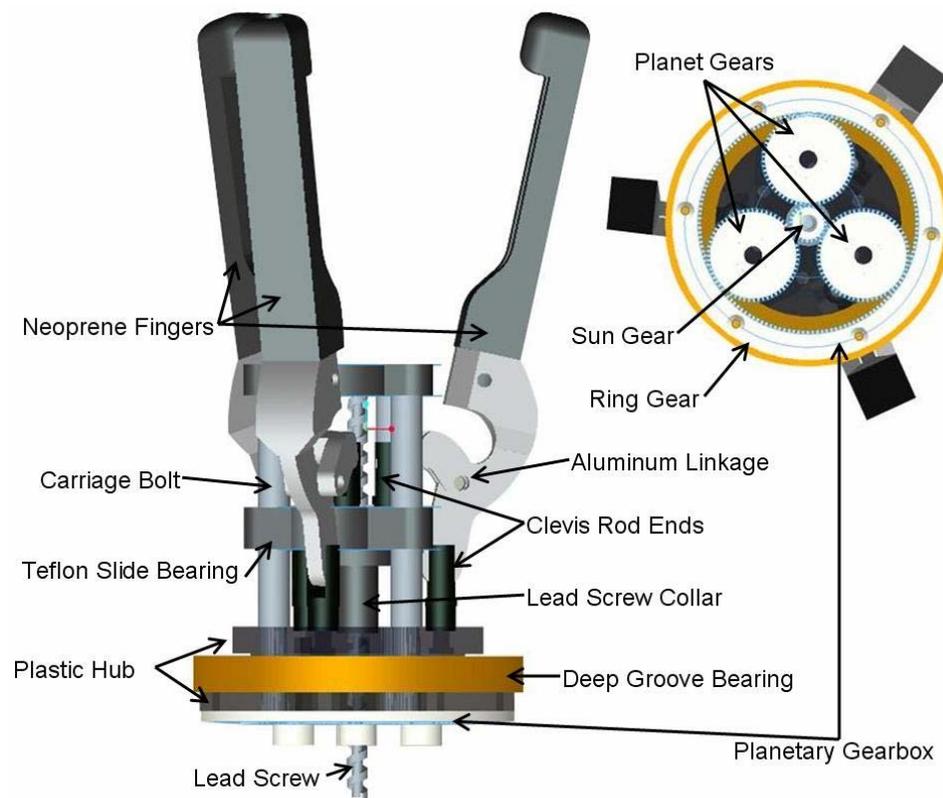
Lead Screw Linkage attached to a Planetary Gearbox, labeled assembly drawing.
